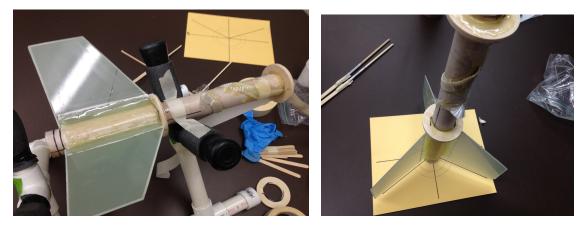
,5. Pictures of motor casing construction including the attachment and alignment of the fins. The fins were attached to the motor casing using epoxy. The lines on the yellow piece of paper were used to help space the fins as evenly as possible. Pictures were taken by a team member.
